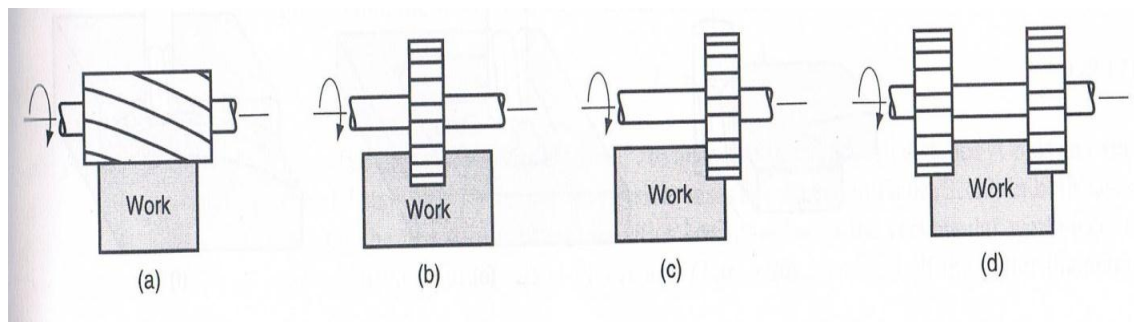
Peripheral milling: (a) Slab milling (b) Slotting milling (c) Side milling
